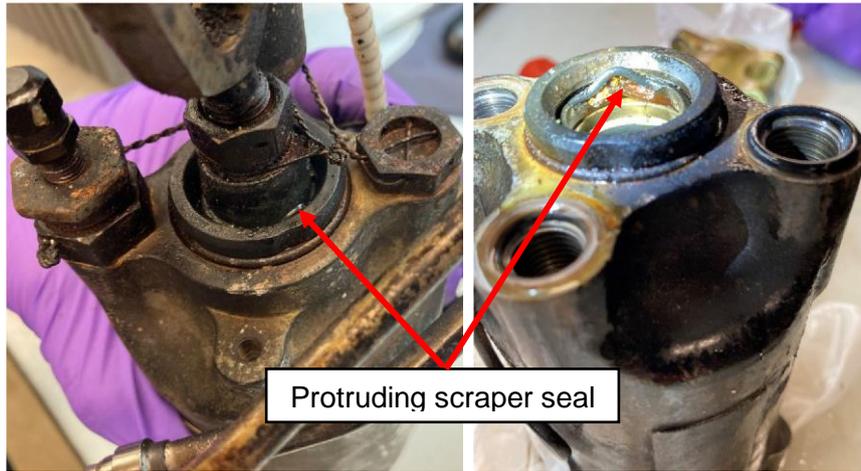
Left pull down actuator showing the protruding scraper seal on the rod end of the actuator.
